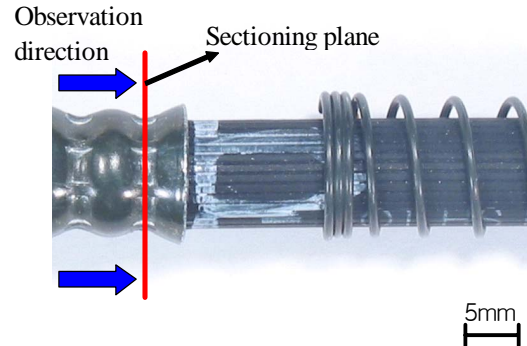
Sectioning the rubber hose assembly for failure observation.
